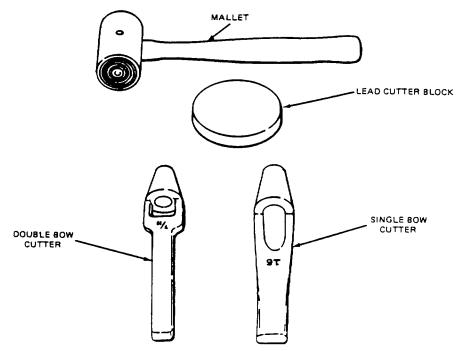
Fabric Cutting Tools for Snap Fastener Installation.
